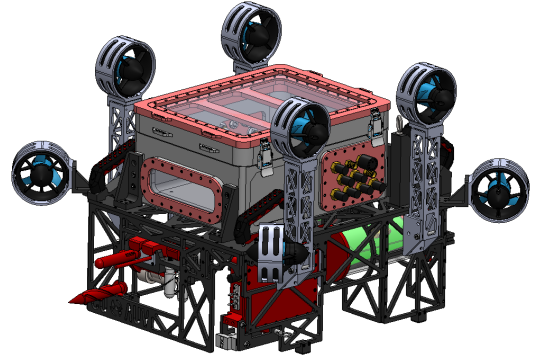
Foldable thrusters in the folded position on the full Orion assembly.
